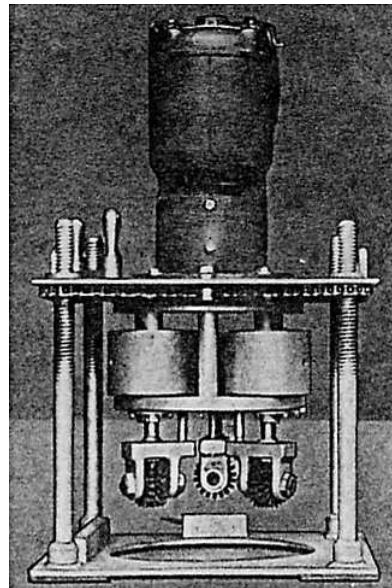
Dressing wheel machine [Lane (1973)]
